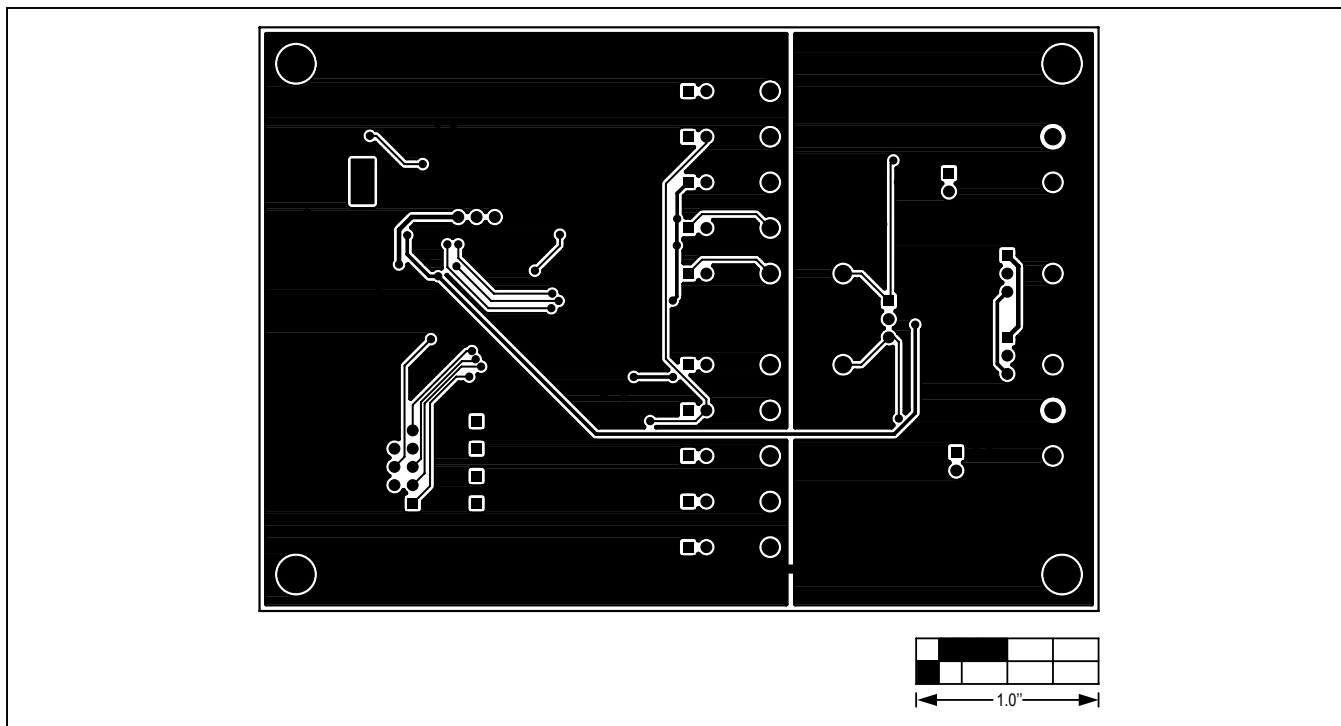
MAX5X05 EV Kit PCB Layout—Solder Side
